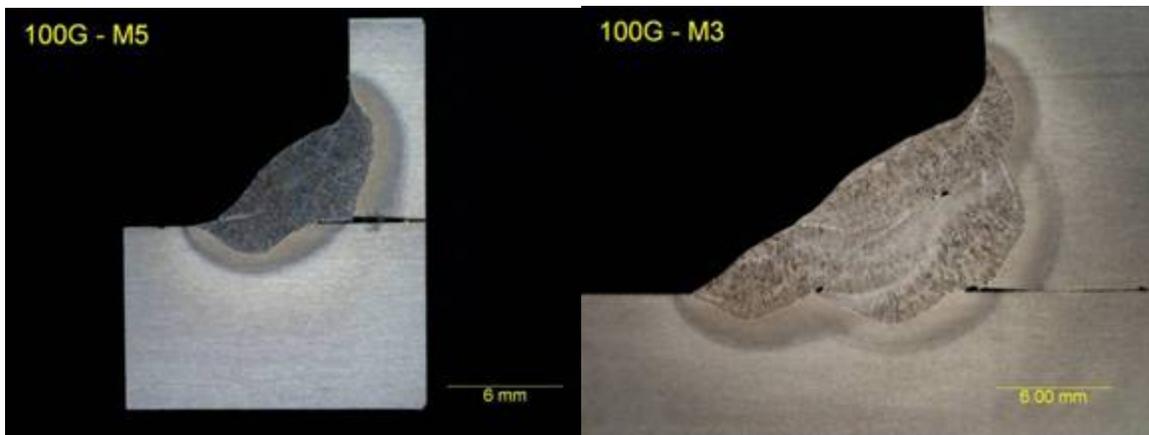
Macros of GMAW Welds on X100 Pipeline Material
